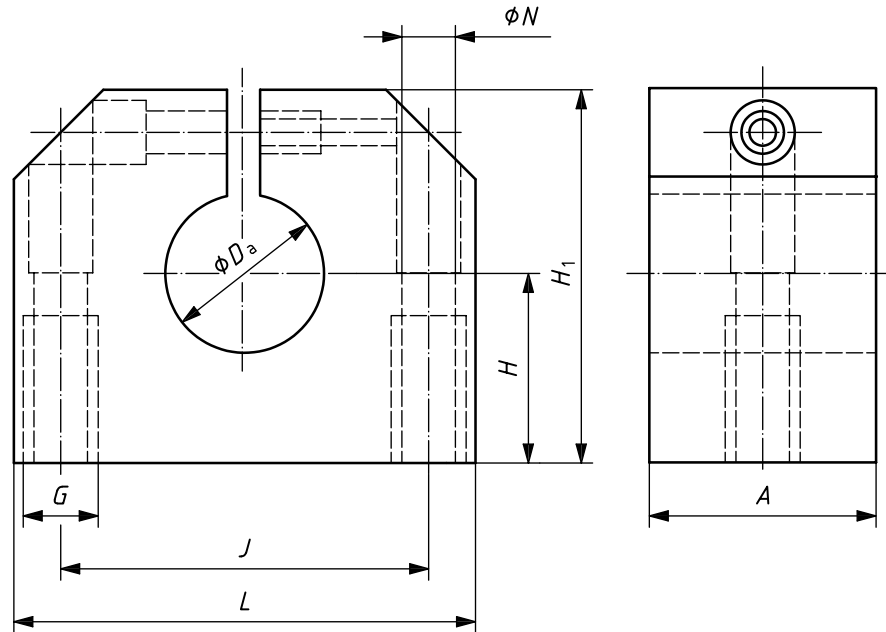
Flangeless shaft support blocks for series 1 and 3 sleeve type linear ball bearings
